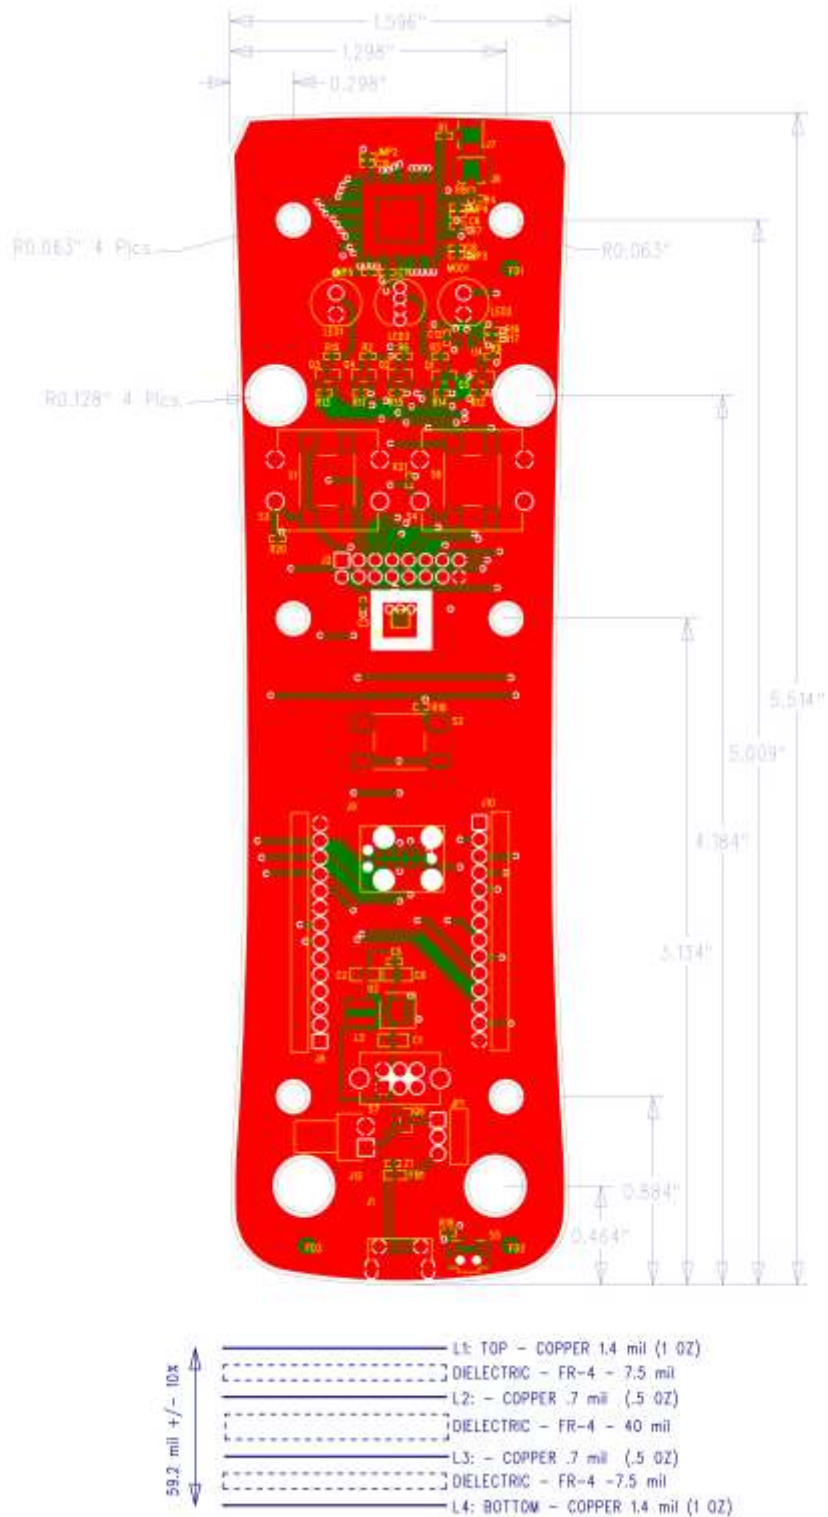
4-Layer Dipole and FlexPIFA Trace Antenna PCB Layout
